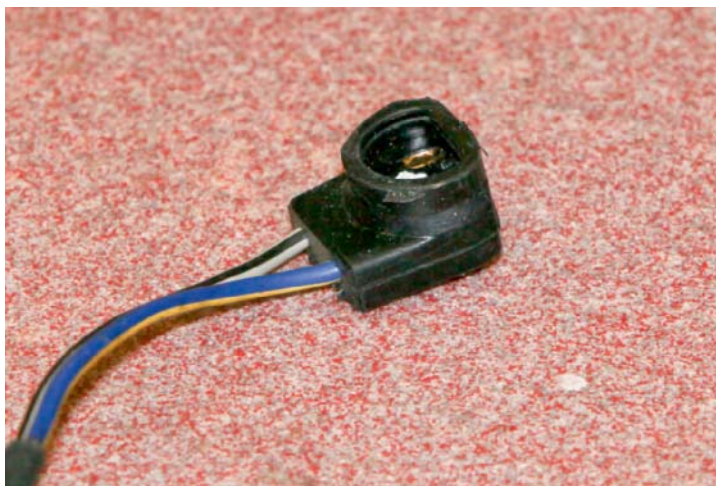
Molded connectors cannot be disassembled to replace damaged terminals or to test.
